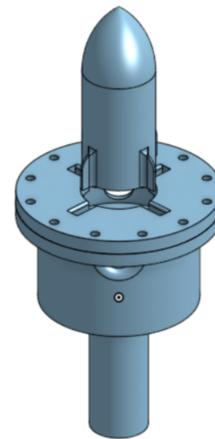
Launching Torpedo Rotating the shaft aligns the fins with the opening, launching the torpedo
